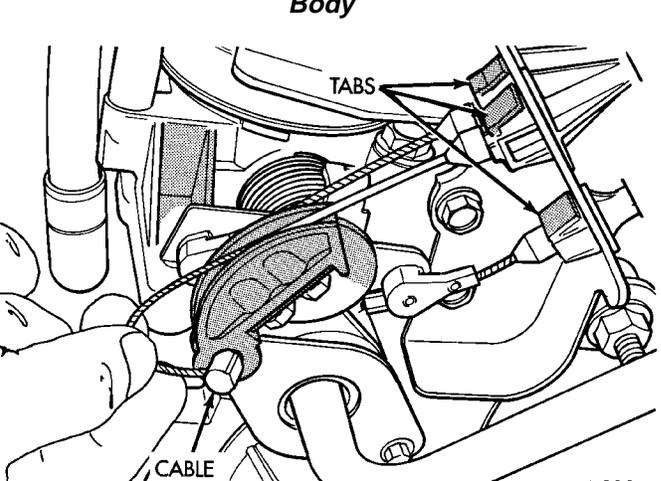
Throttle Cable Attachment to Throttle Body
